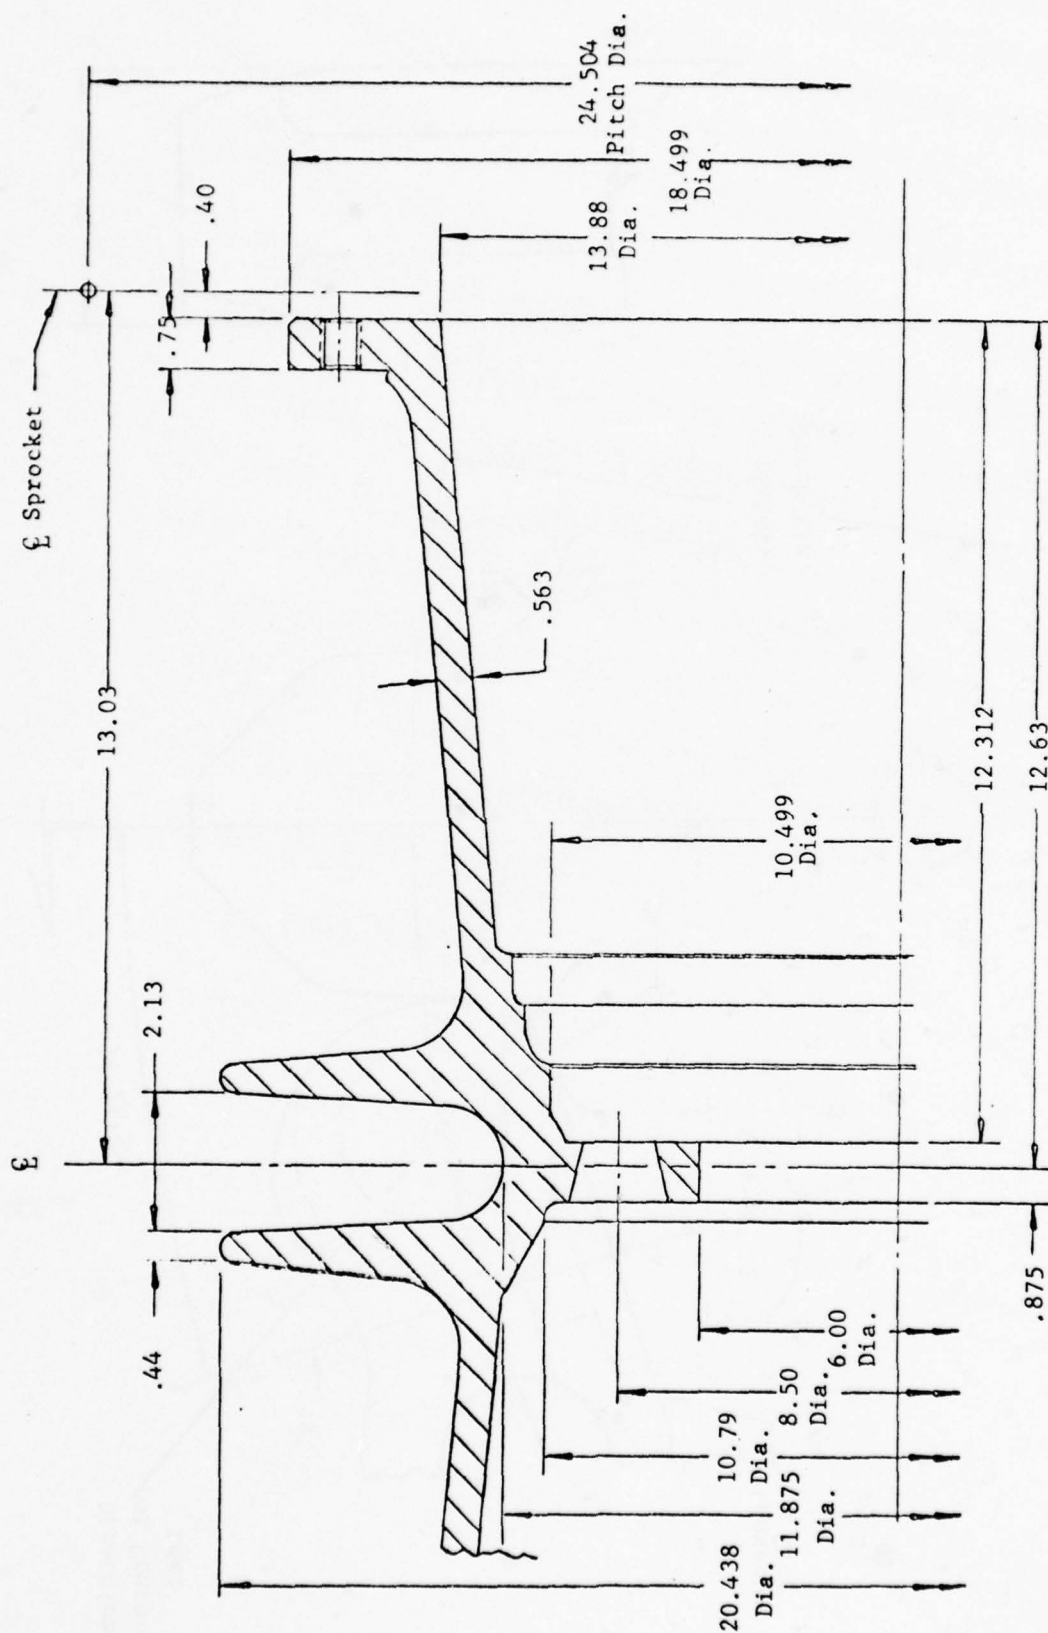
Dimensional Requirements of Drive Wheel Hub (Metal)
